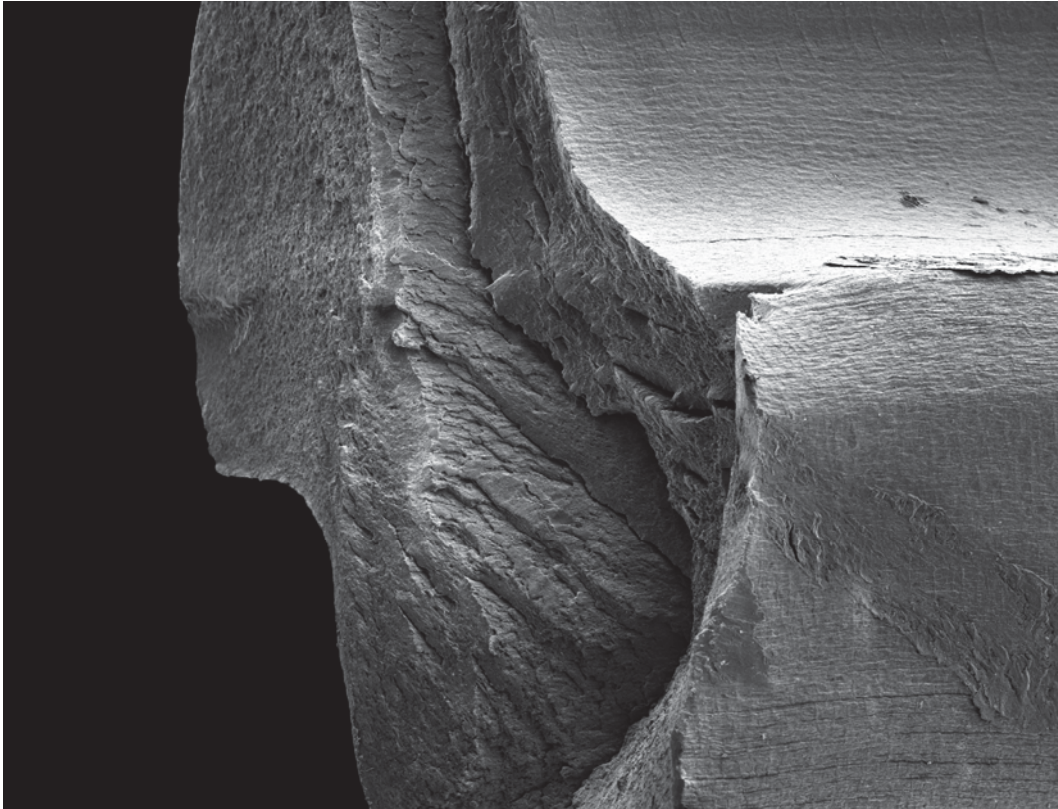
Shaped outer wire, cracks have initiated at the points of contact with neighbouring wires. The start of the fatigue crack can be seen on the left of the picture.
